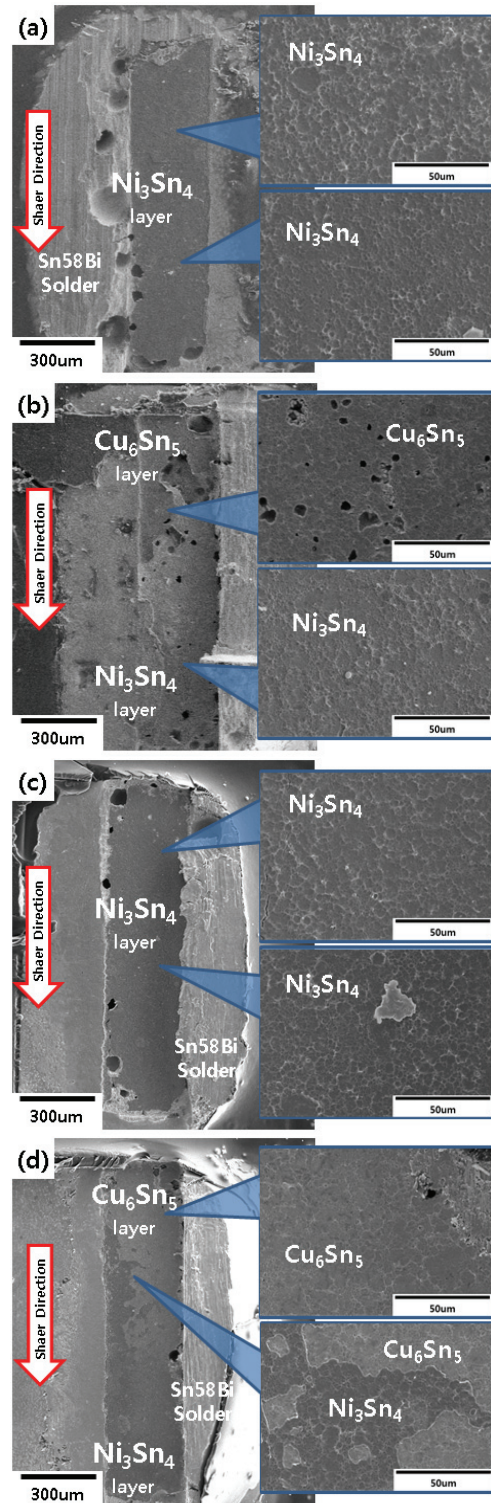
Fracture surface of Sn58Bi and Sn58Bi epoxy solder joint (a) before the ageing test in plain solder joint, (b) after the ageing test in plain solder joint, (c) before the ageing test in epoxy solder joint, and (d) after the ageing test in epoxy solder joint.
